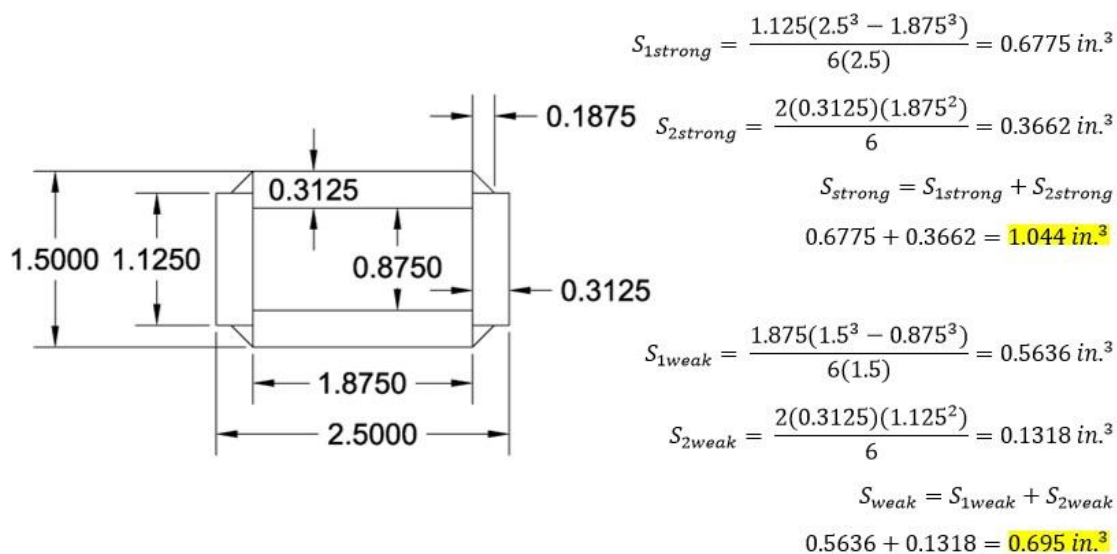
Built-Up Splice Tube Section Moduli Calculations
